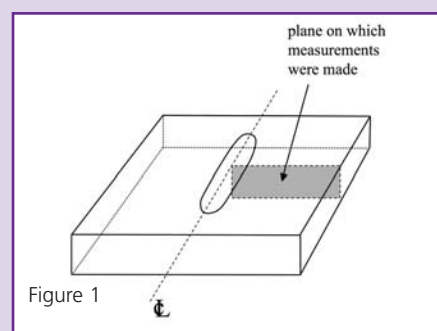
Schematic representation of the bead on plate specimens in ferritic RPV steel. Plate dimensions 180 x 120 x 20 mm; bead length ~ 100 mm.
